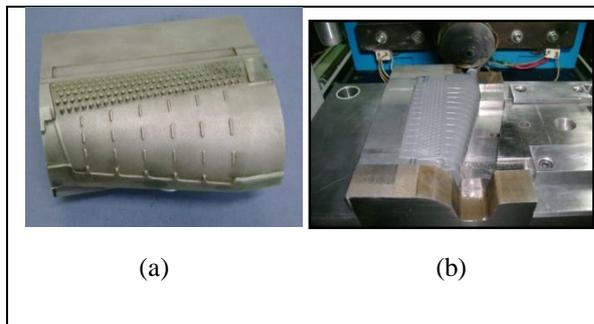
(a) Convex die block at semi-finish level and (b) Fully assembled ceramic core die on injection machine
